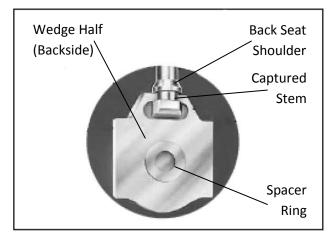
Cutaway of Equiwedge Two-Piece Wedge
